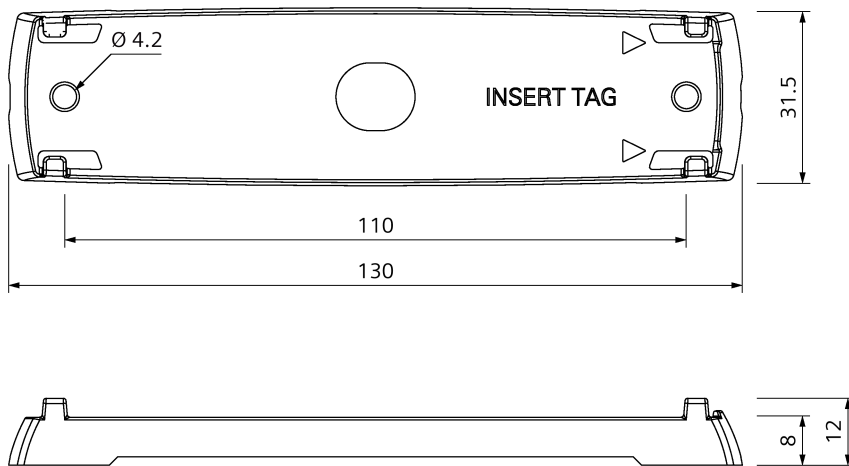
Dimension drawing spacer for SIMATIC RF621T
